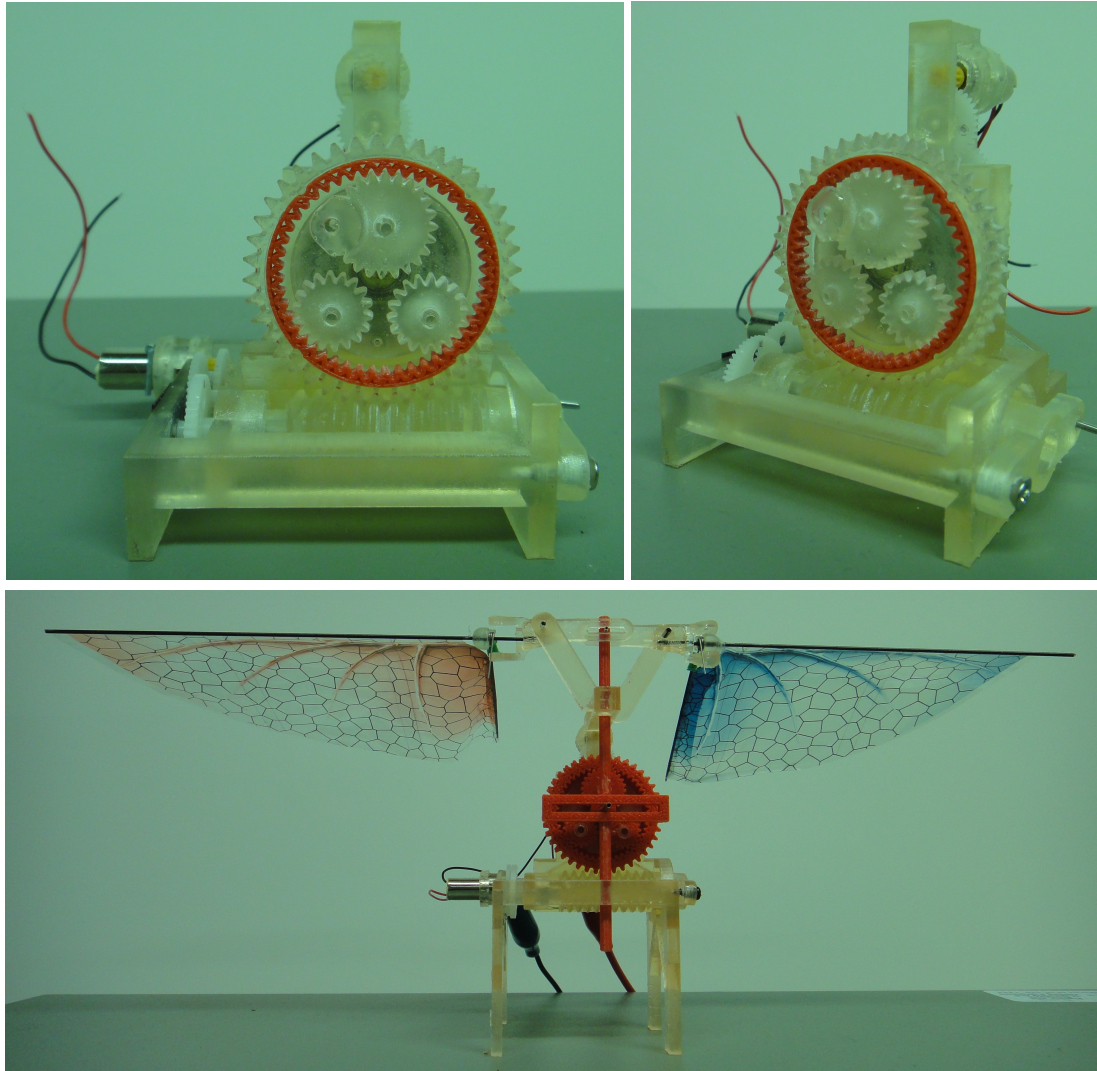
Hypocycloidal Gear Mechanism, called MorphES: Inter-meshing of the internal gears (Top); Assembled Prototype (Bottom)
